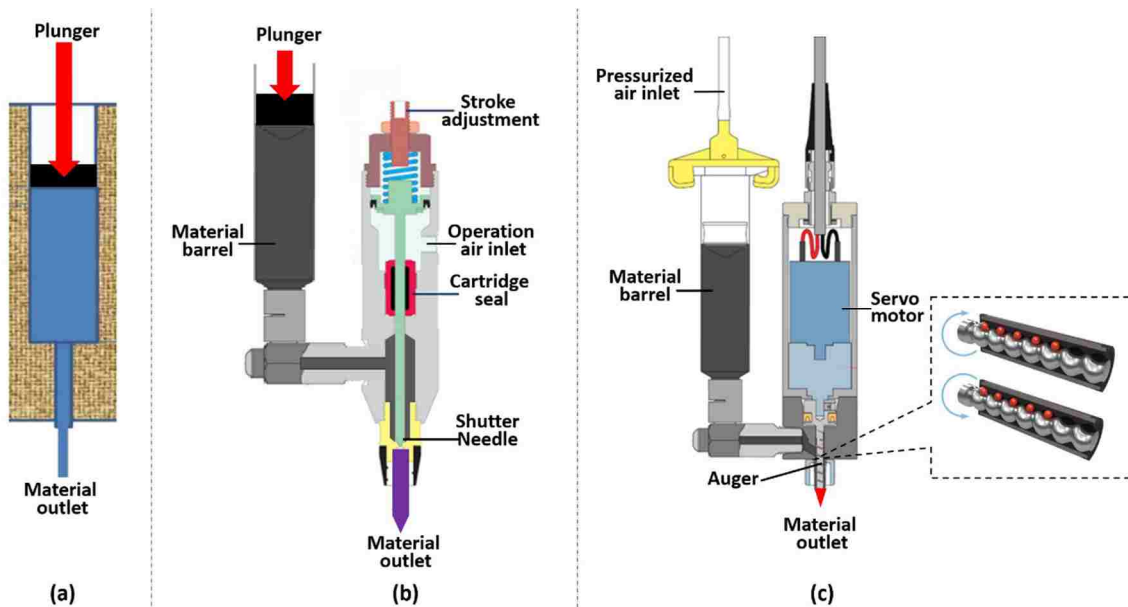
Schematic of three extrusion mechanisms: (a) Ram extruder (b) Shutter valve based extruder [27] (c) Auger extruder (EFD Inc. 2003, ViscoTec Inc. 2014).
